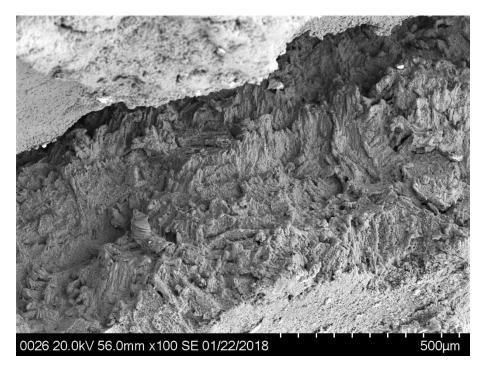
Fracture surface of the crack (Image No. 14430_0026.jpg)
